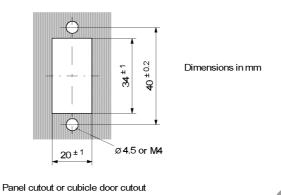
Dimensions of panel flush or cubicle door cutout of D-subminiature female connector of dongle cable
